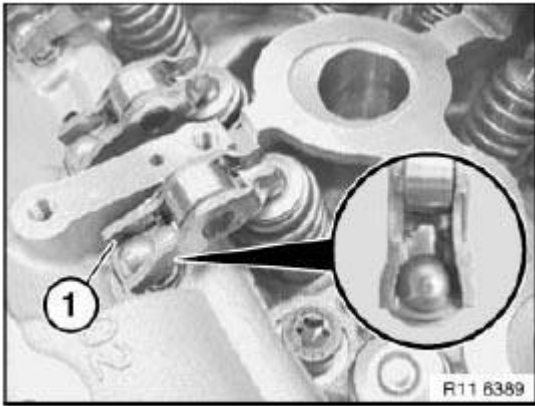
Installing Roller Cam Follower On HVCA Element And Valve
